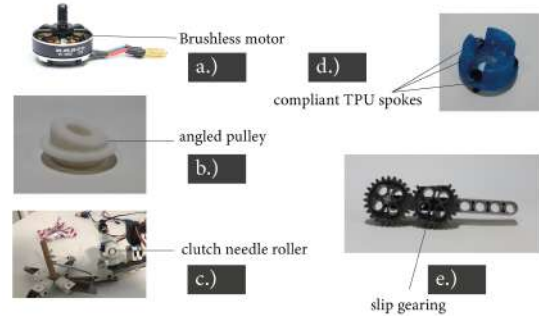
Various buckling mechanism designs a) Brushless motor b) angled pulley c) Clutch bearing d) Compliant TPU spokes e) Slip gearing.
